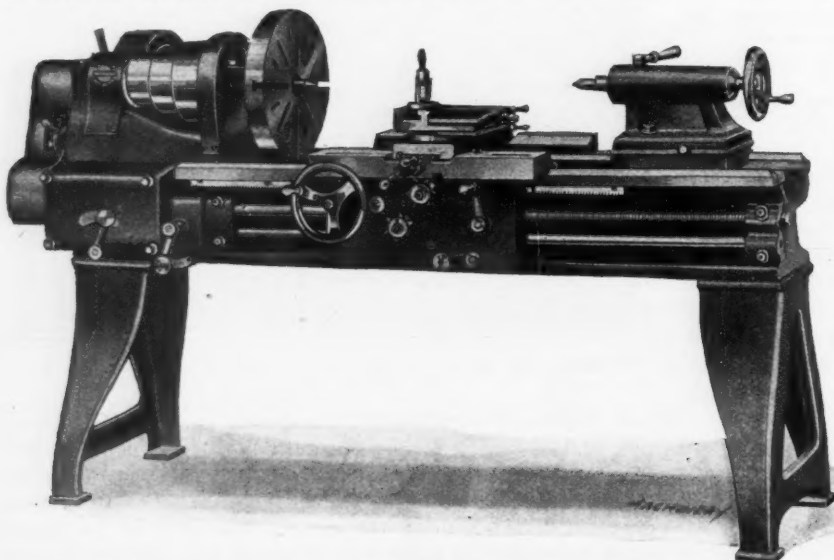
Universal Machinery Co.'s 16-inch Engine Lathe with Semi-quick-change Gear
